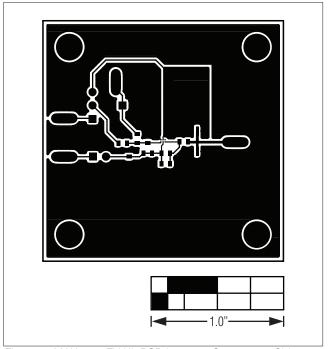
MAX4470 EV Kit PCB Layout—Component Side
